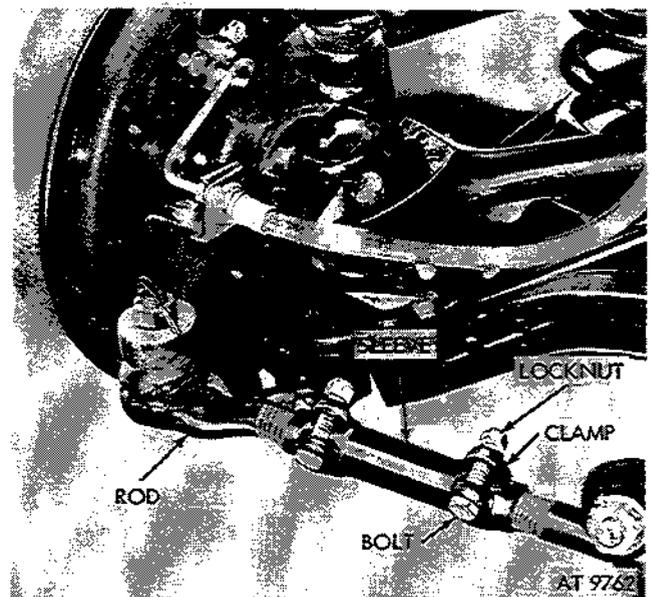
Loosen locknut on two clamps on both spindle arm tie-rod adjusting sleeves.
